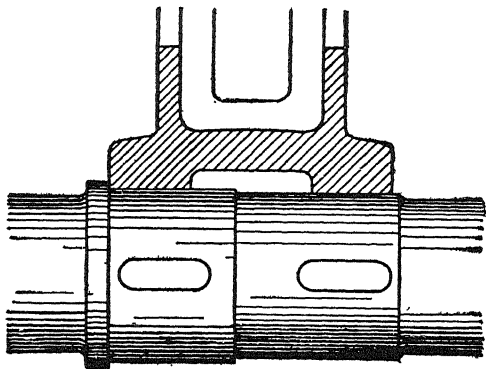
Hub and shaft design on large machines to reduce the machine work and facilitate erecting.
